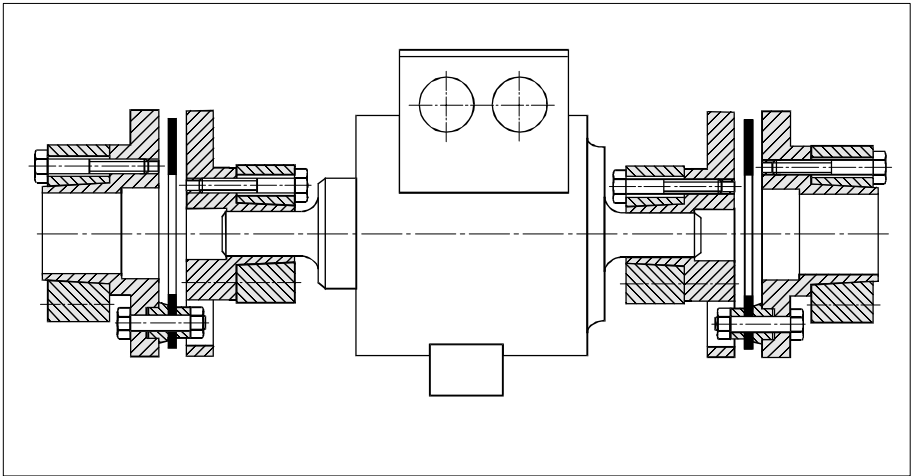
T34FN torque transducer with steel multi-disk couplings
